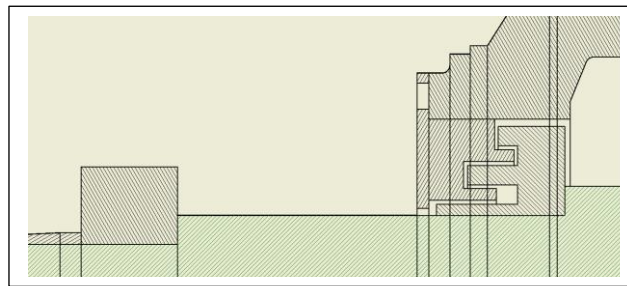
Standard labyrinth seal fitted to the grinding Roller of raw mill 7.
